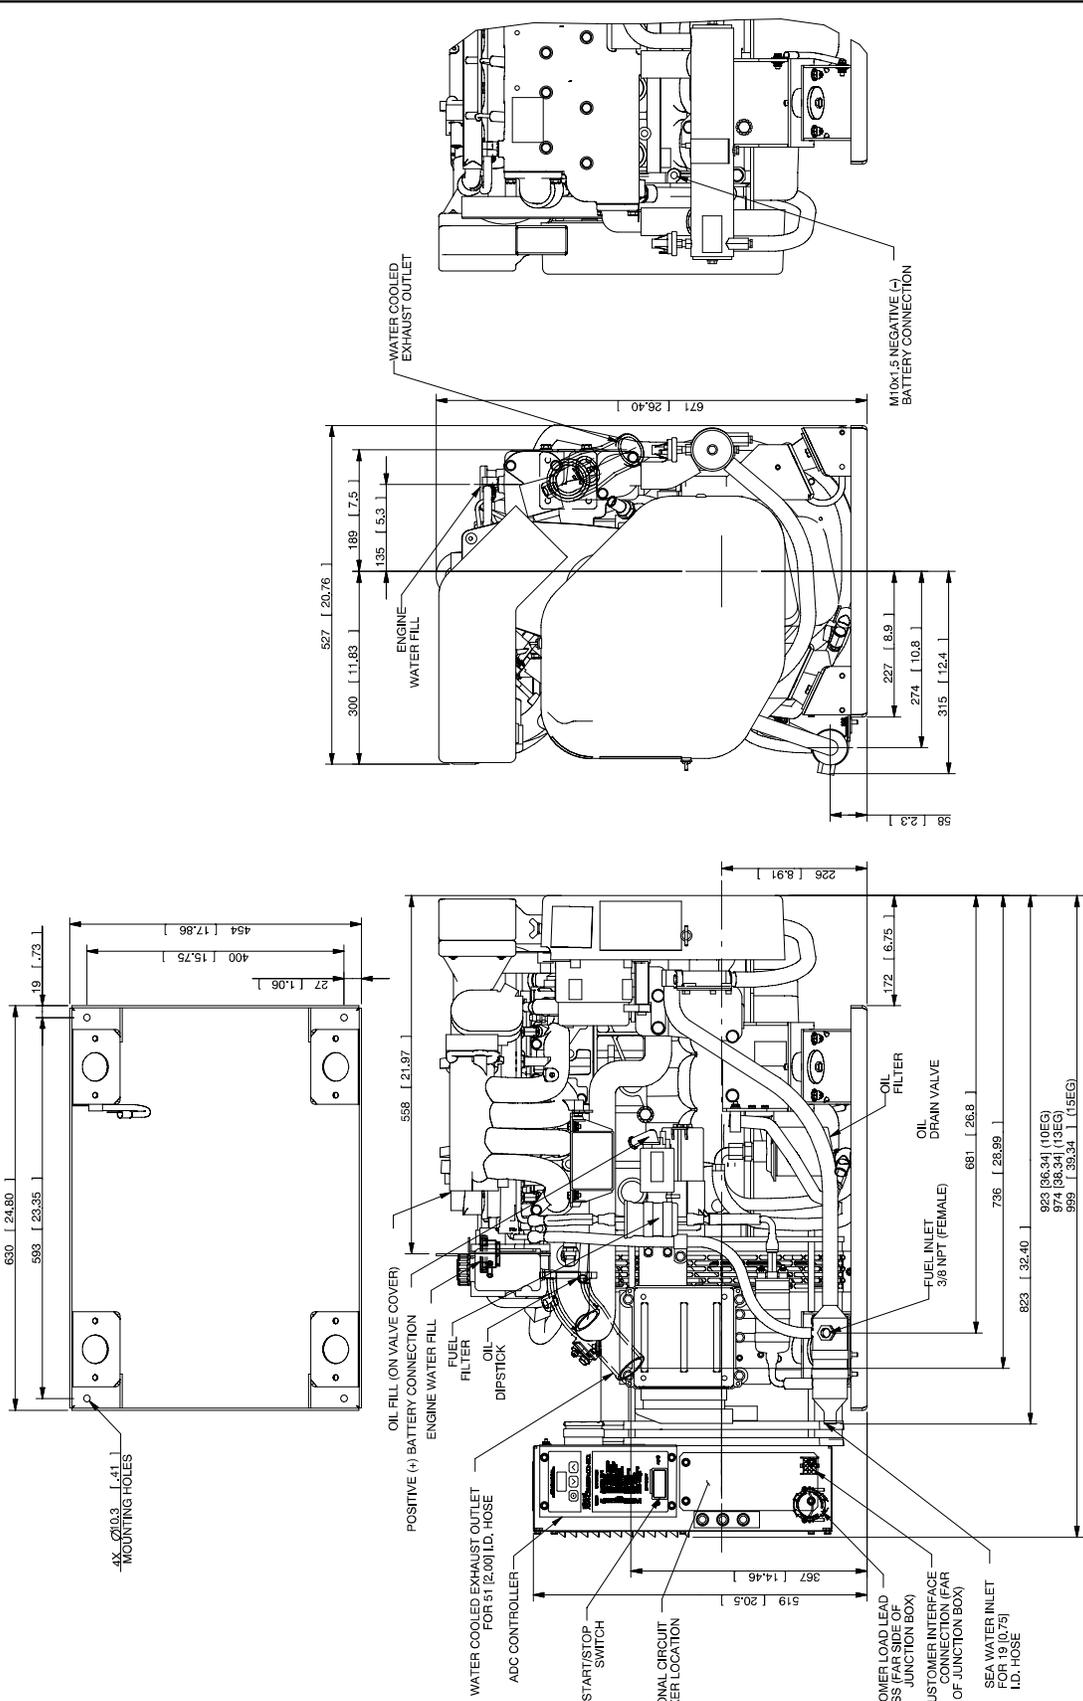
Dimension Drawing ADV-6382A-F, 15/20C and 12.5/17.5CF Models
